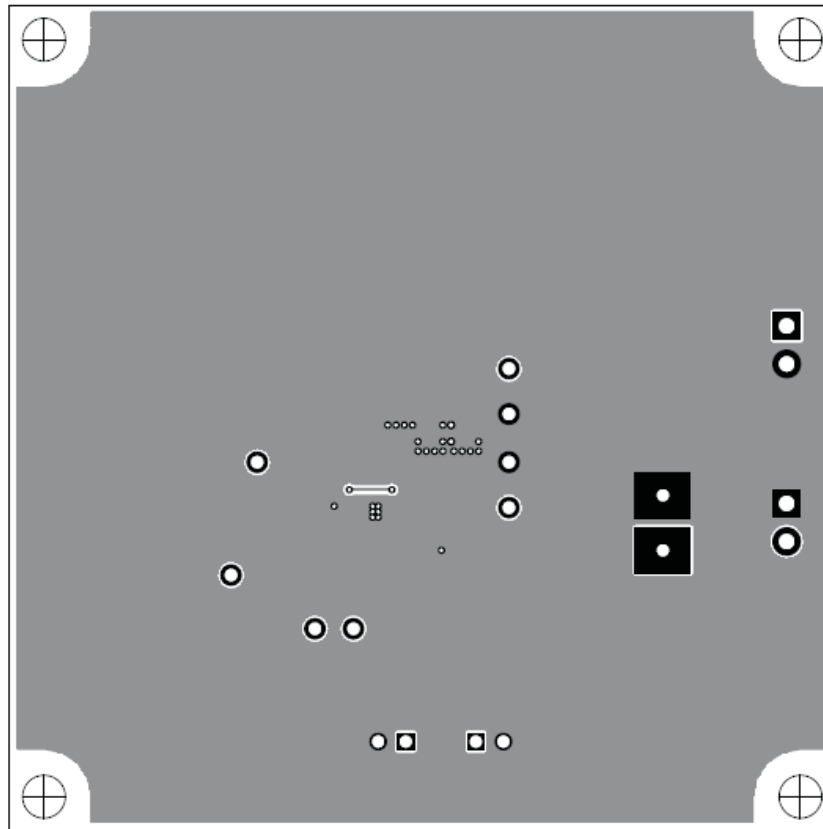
TPS54240EVM-605 Bottom-Side Assembly
